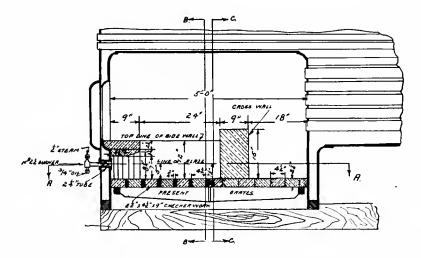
Equipment of locomotive type stationary boiler when the burner cannot be inserted through throat sheet.
